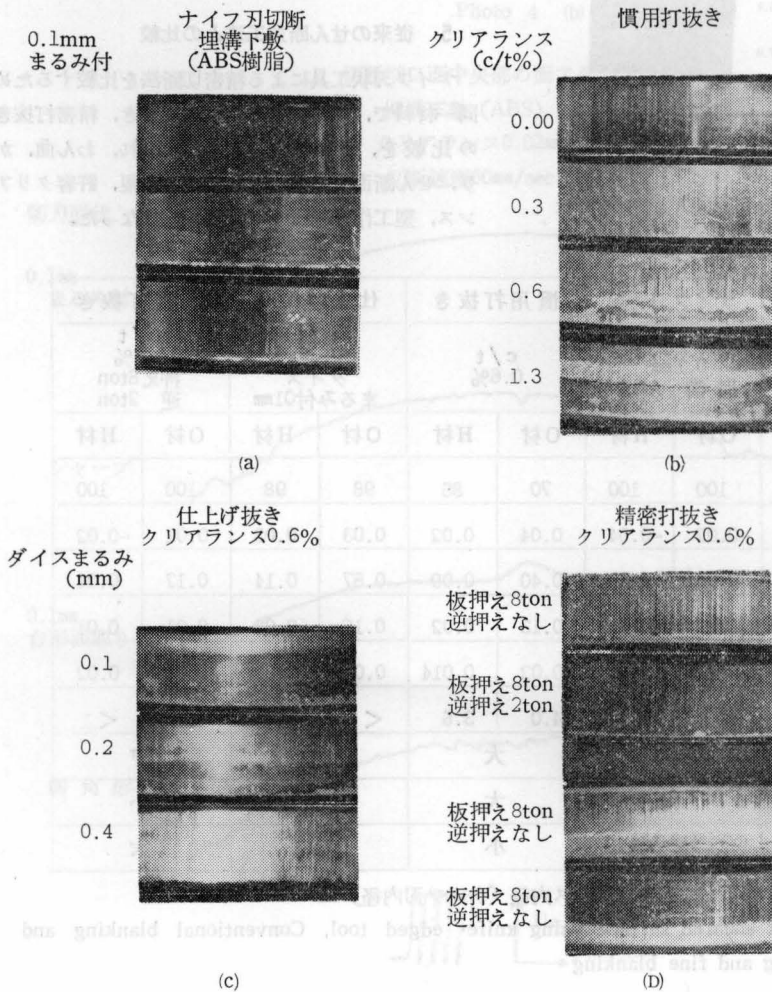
Comparison of sheared Surface using Knife edged tool, Conventional blanking and finish blanking and Fine blanking.
